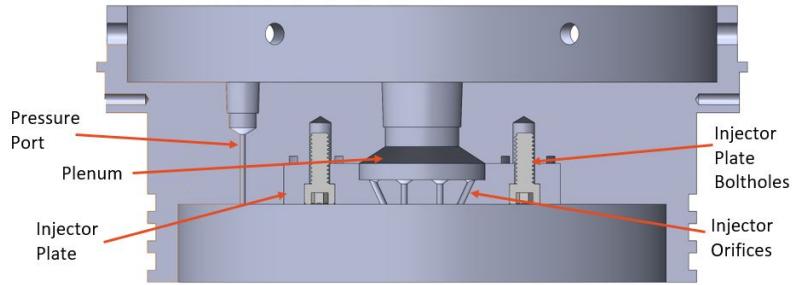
Cross-sectional view of injection bulkhead with injector plate.
